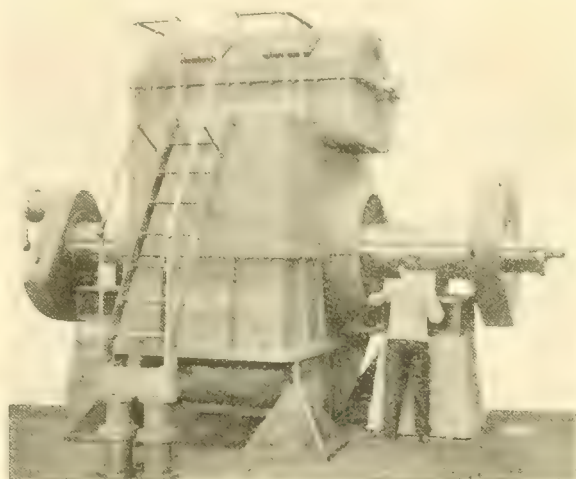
COMPLETELY ASSEMBLED FLEXIBLE PINION REDUCTION GEAR, WITH THE COMPRESSOR CRANKS PRESSED ON THE ENDS OF THE SLOW-SPEED SHAFT
